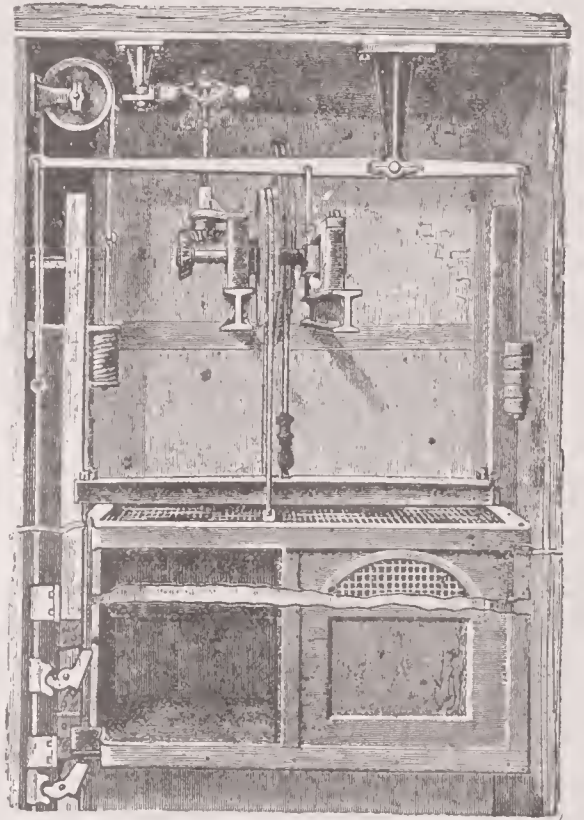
SAFETY ATTACHMENT FOR ELEVATORS.
